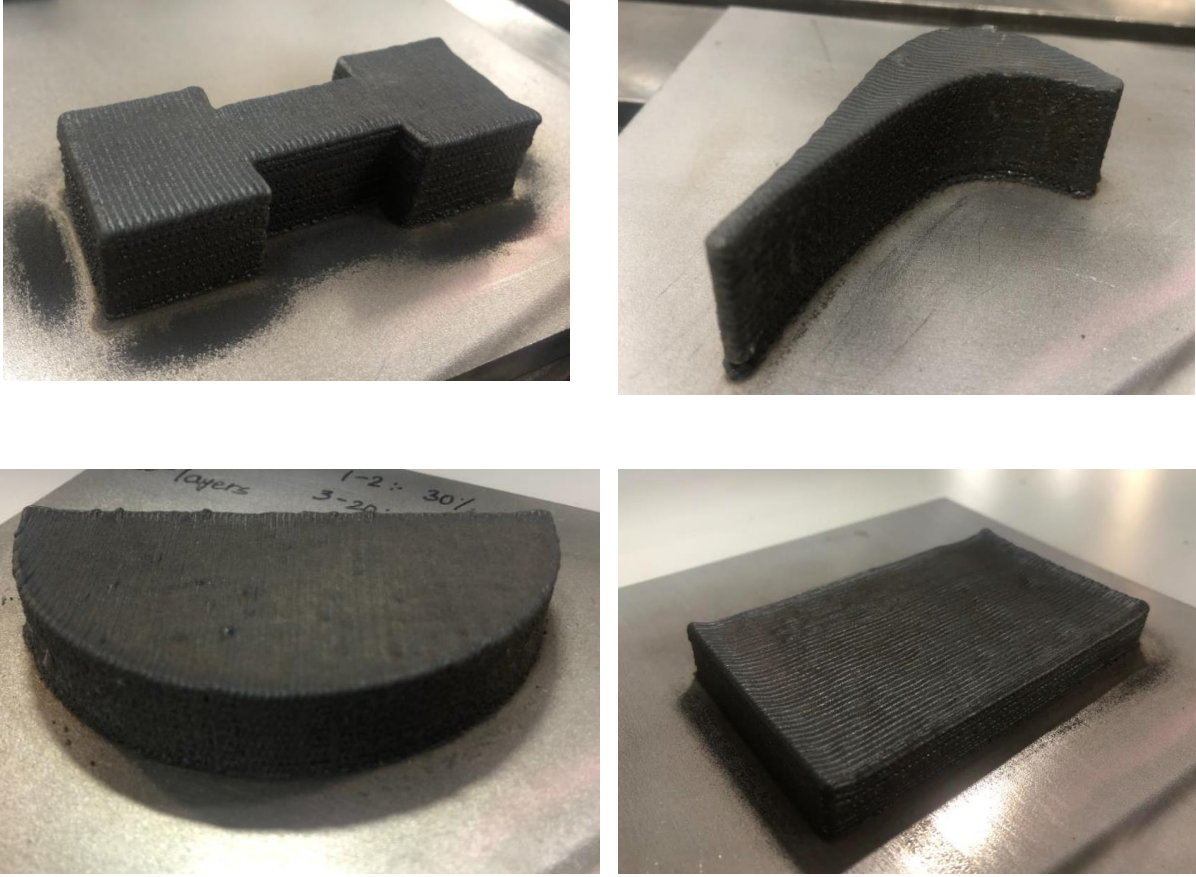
Examples of LDED-PF parts printed for surface defect detection using deep learning
